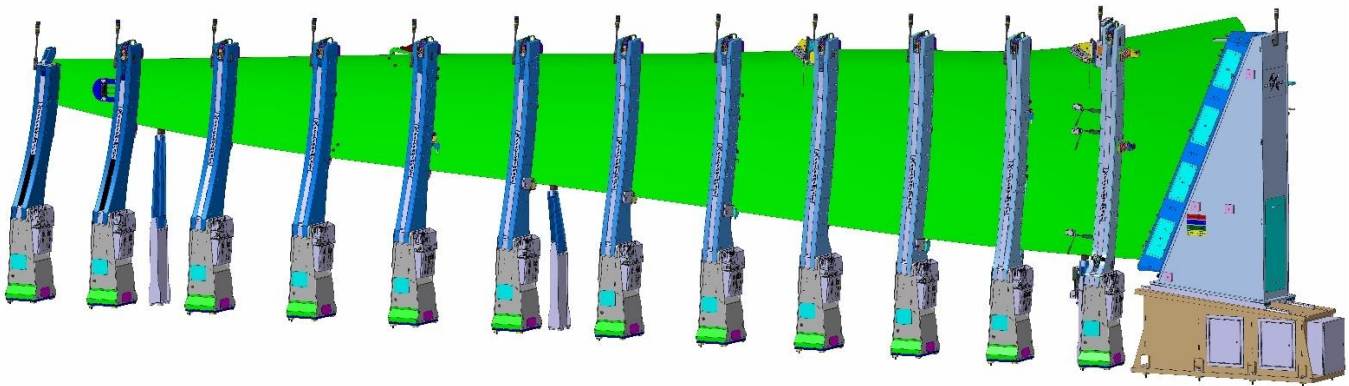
Overview of the Skinny Fixture: Posts, Endgate, and Trailing Edge Indexes Shown
